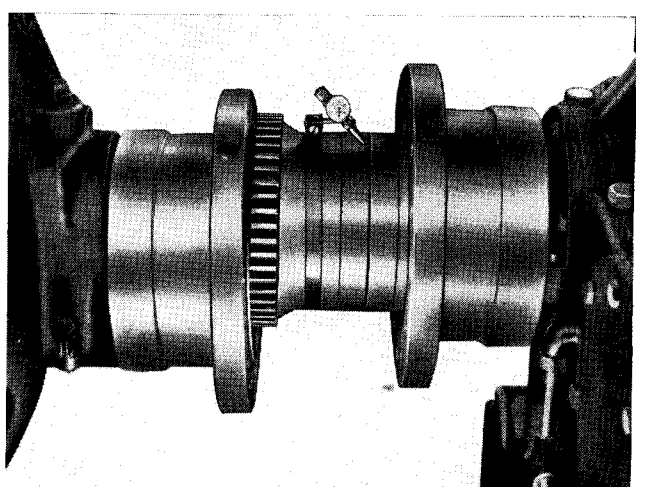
Checking Angular Alignment with Dial Indicator on Face of Hub
